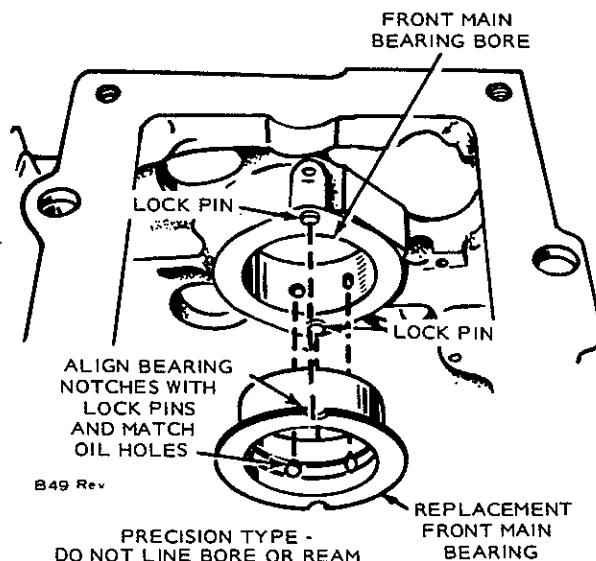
FRONT MAIN BEARING INSTALLATION—NH ENGINE
